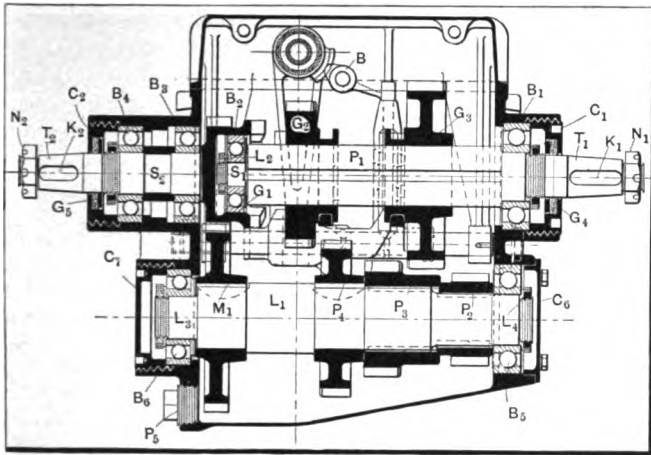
Section of the transmission gear of the selective three-speed type with stout spindles centered on F. & S. annular ball bearings
